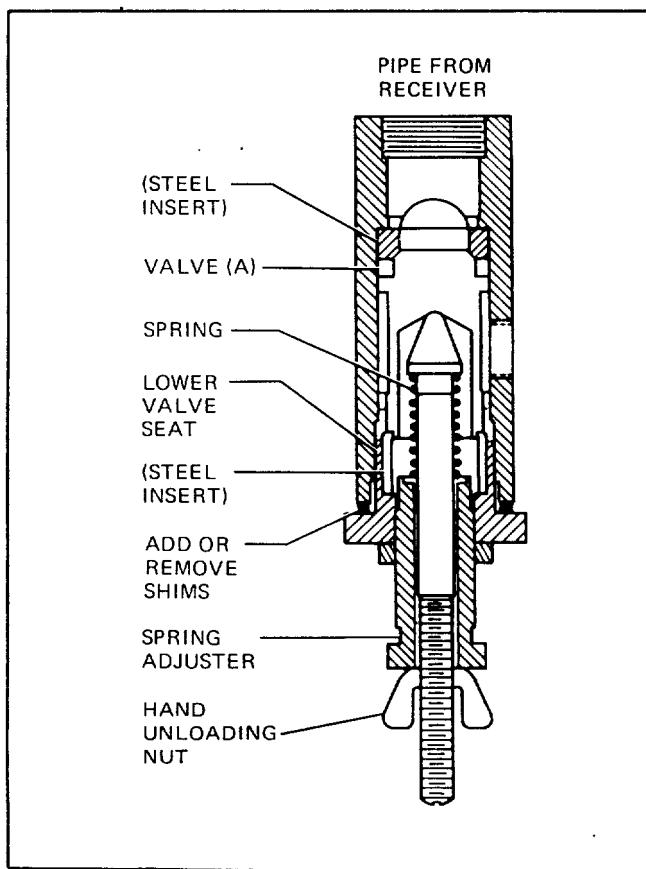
Sectional View of Type XAA Auxiliary Valve.
